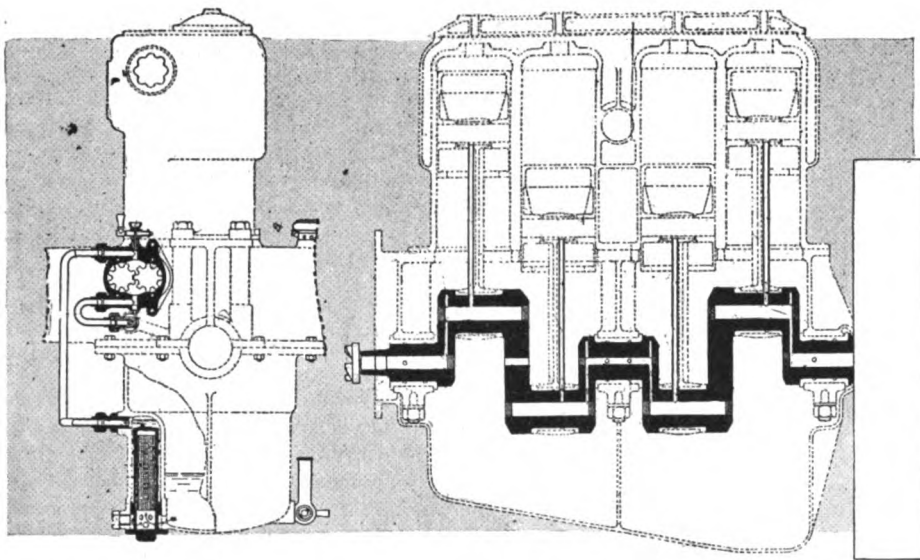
Two views of the Lancia motor showing the oiling system. It is a force feed type in which oil is carried to all the bearings through a hollow crankshaft
